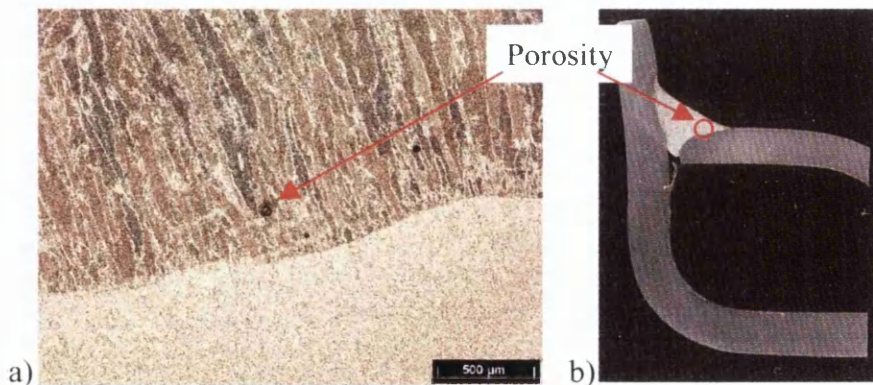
a) Weld Porosity in the FUCA Components, b) Location of Porosity
